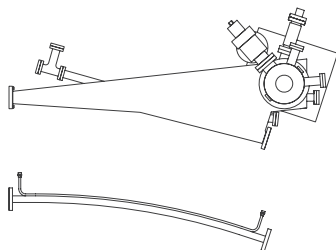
Drawings of the standard stainless steel dipole vacuum chamber (top) and the new NEG-coated copper dipole vacuum chamber (bottom).
